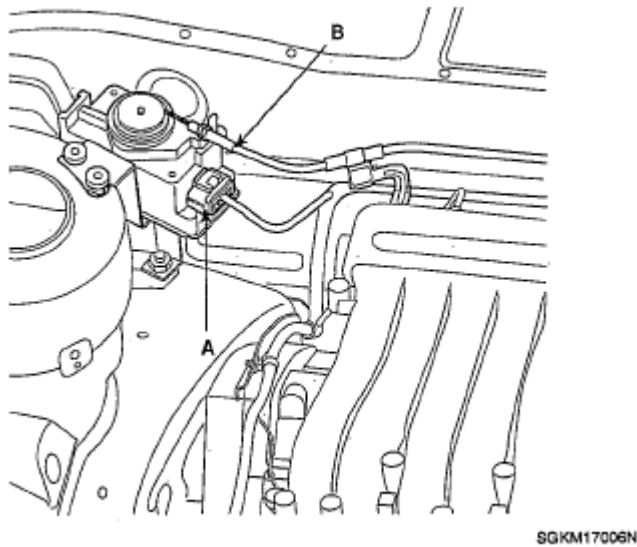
Identifying Auto-Cruise Connector And Auto-Cruise Cable
